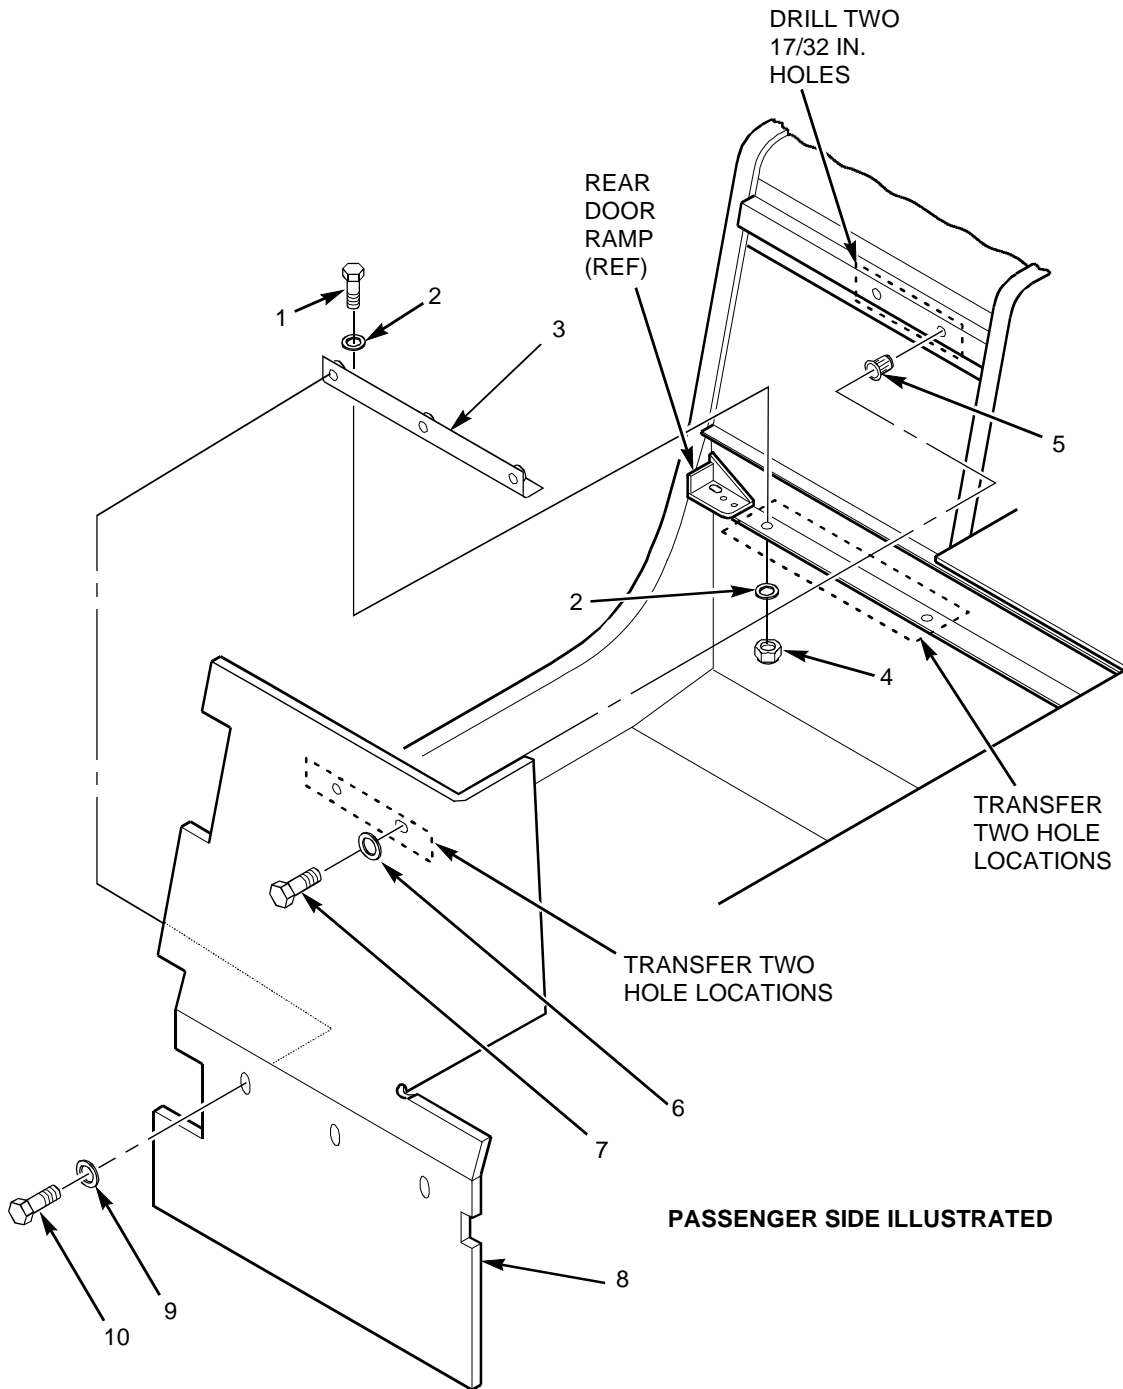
Rear Seat Backing Plates Installation (4 Door Only)
